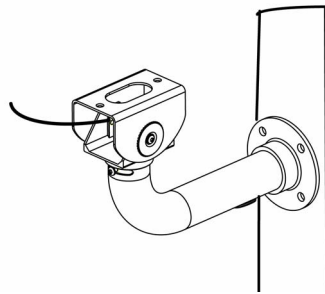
Feeding the Wire using the Rear NPT Fittings
